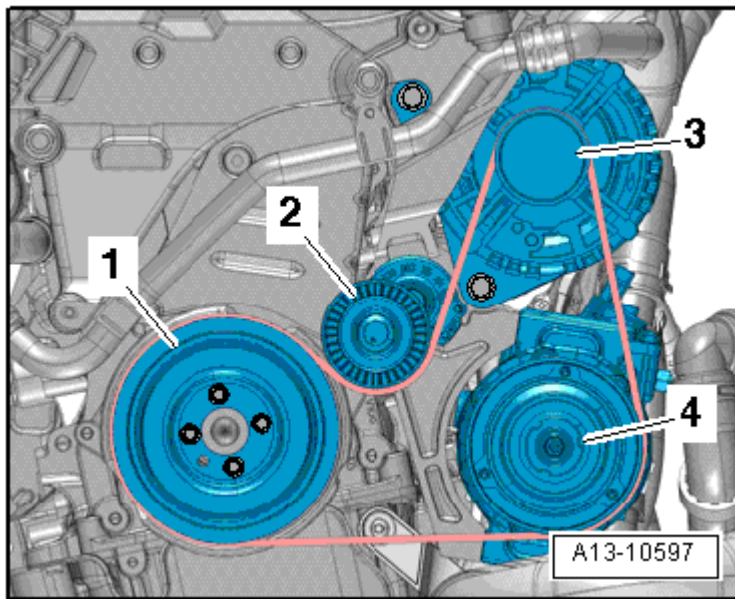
Identifying Vibration Damper, Belt Tensioner, Generator And A/C Compressor
